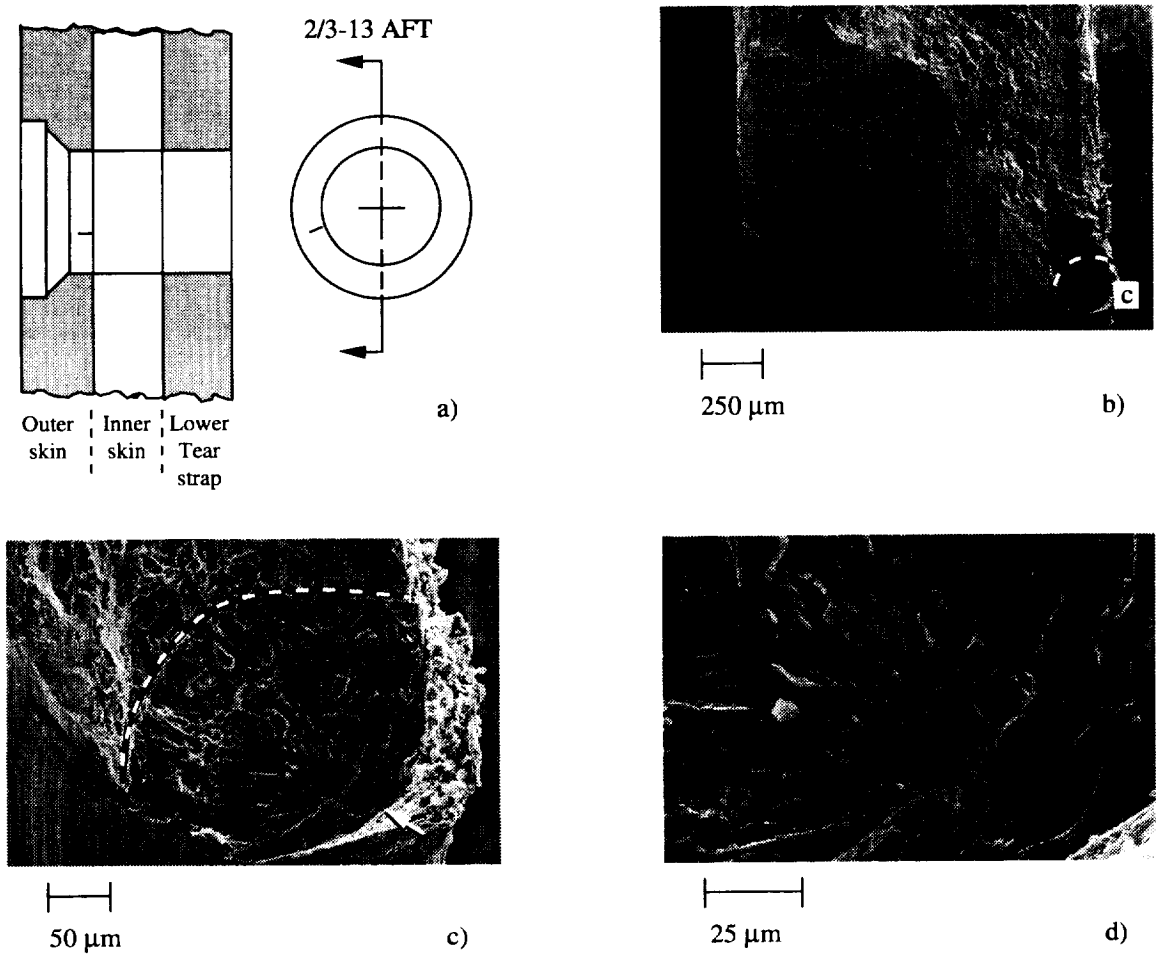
a) The schematic shows the rivet hole 2/3-13 configuration and the location of the outer skin fatigue crack oriented in the aft direction and at about the 8 o'clock position. b) The SEM micrograph shows the fatigue crack fracture surface located at the shank region of the rivet hole contained in the outer skin. The dashed line marks the fatigue crack front. c) The SEM micrograph shows region "c" in Figure 8.27.b at higher magnification. The arrow marks the crack initiation site and the dashed line marks the fatigue crack front. d) The SEM micrograph shows the crack initiation region marked by the arrow in Figure 8.27.c.
